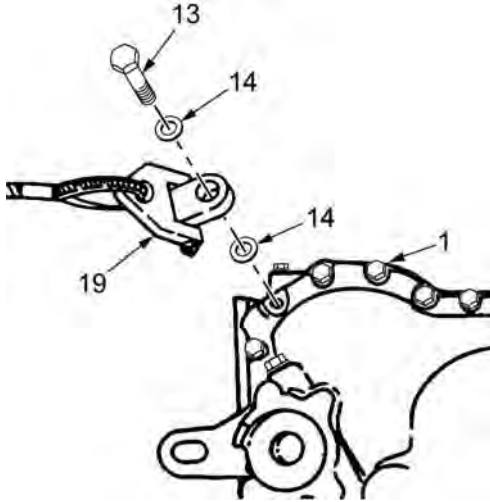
Attachment of Multiple-Leg Sling on Right Cover Assembly.
